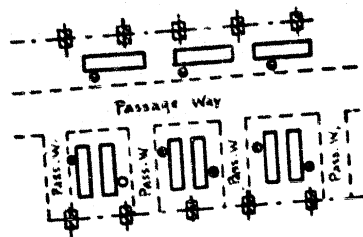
Longitudinal and Transverse Placement of Machine Tools in Aisle
